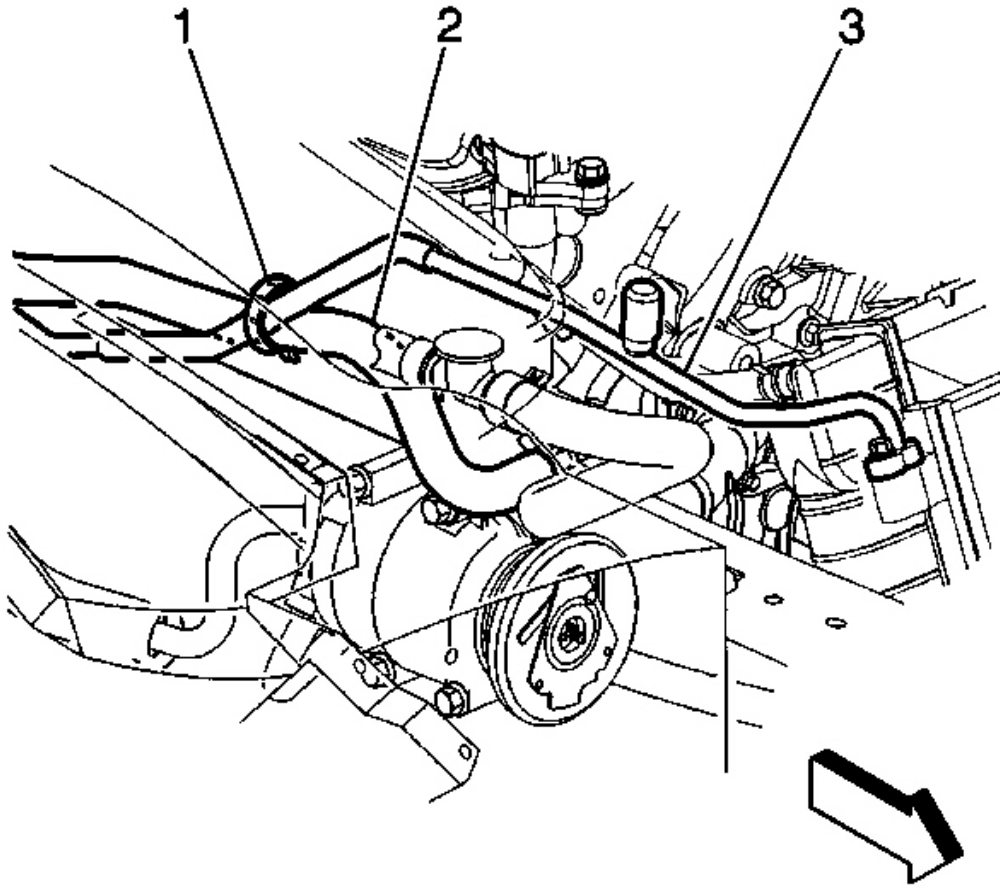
Front Evaporator Tube, Heater Inlet Hose & Retaining Strap
